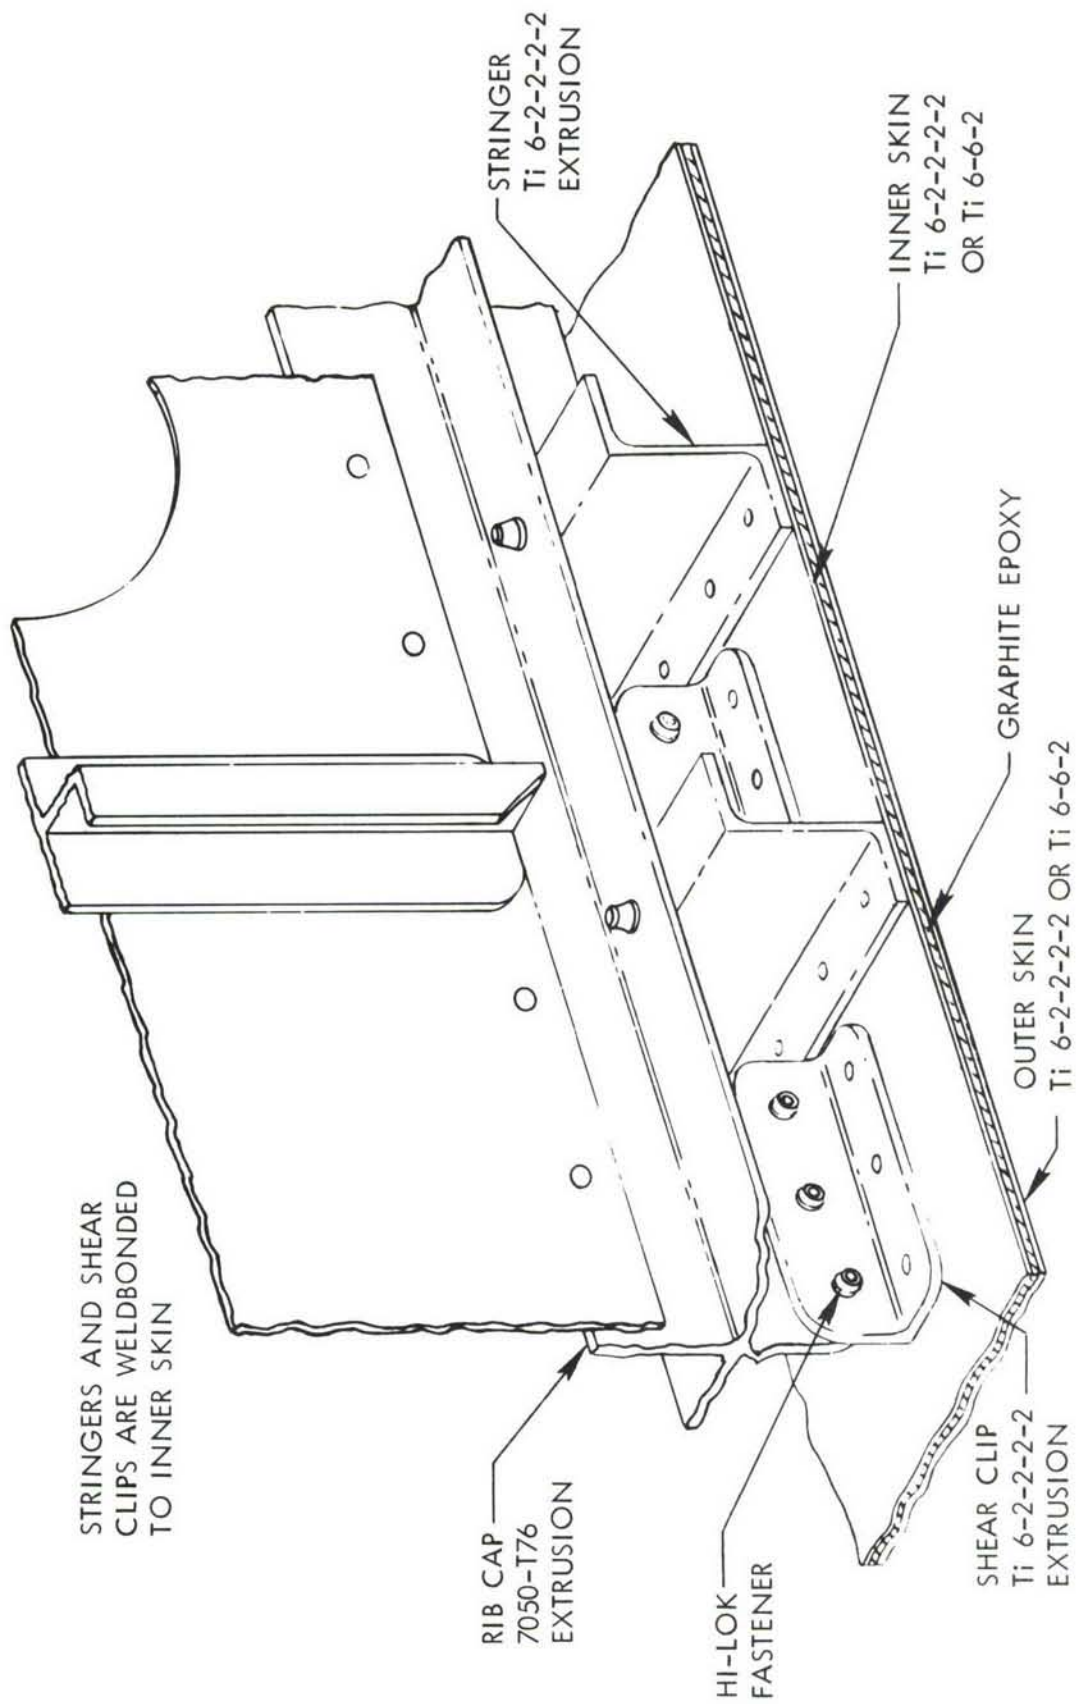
RIB TO COVER ATTACHMENT - LOCKSKIN
